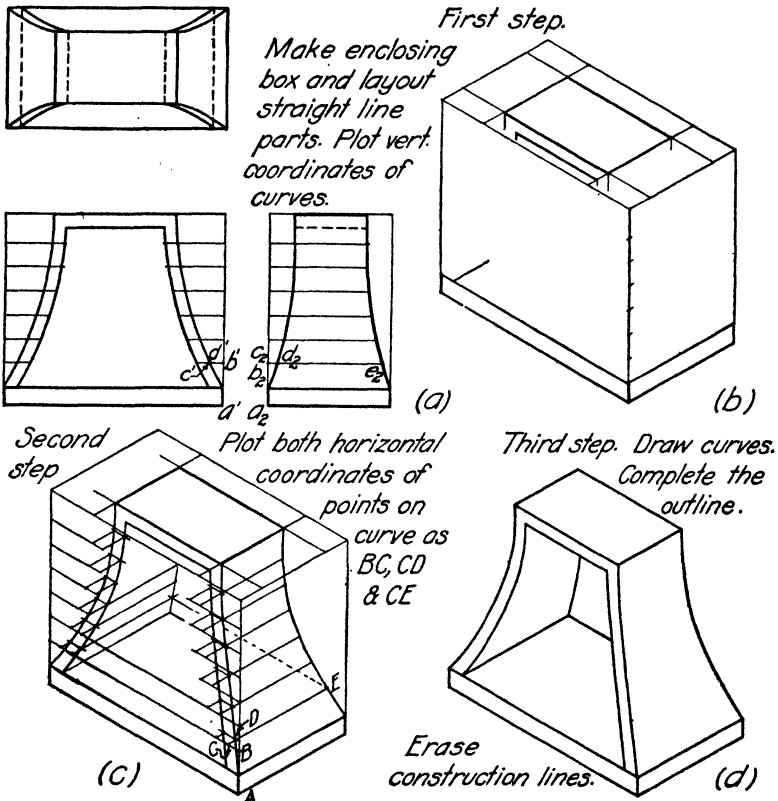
Steps in constructing an isometric drawing with three dimensional curves.
